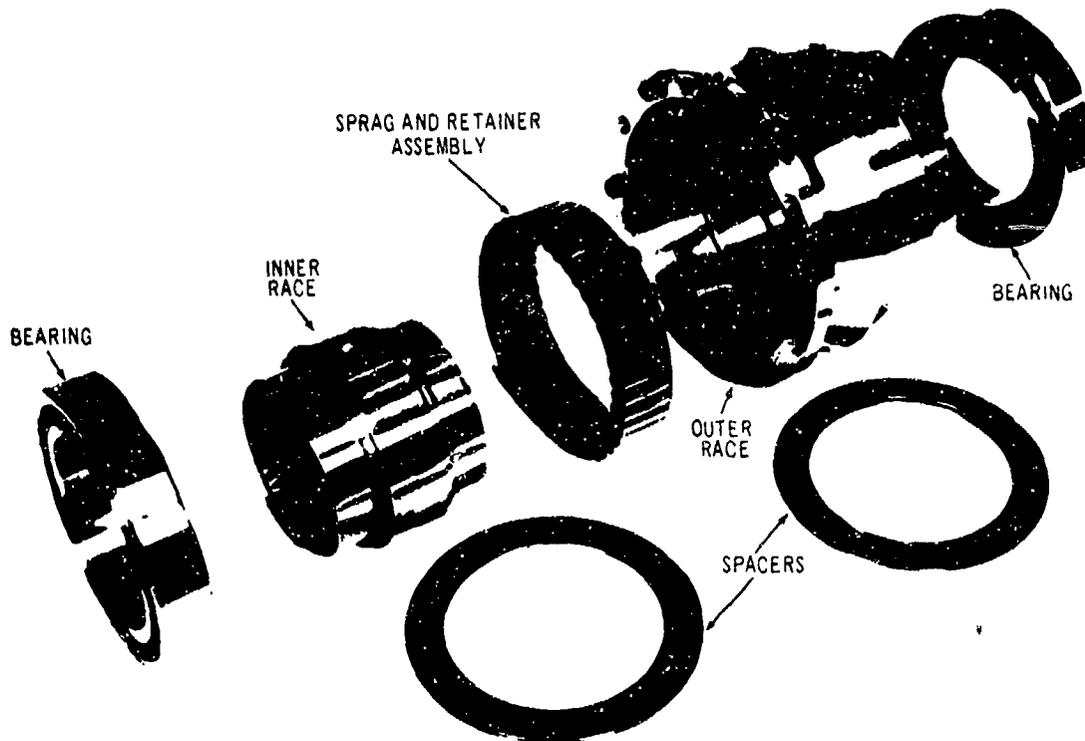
Components of UH-2C Overrunning Clutch Assembly
